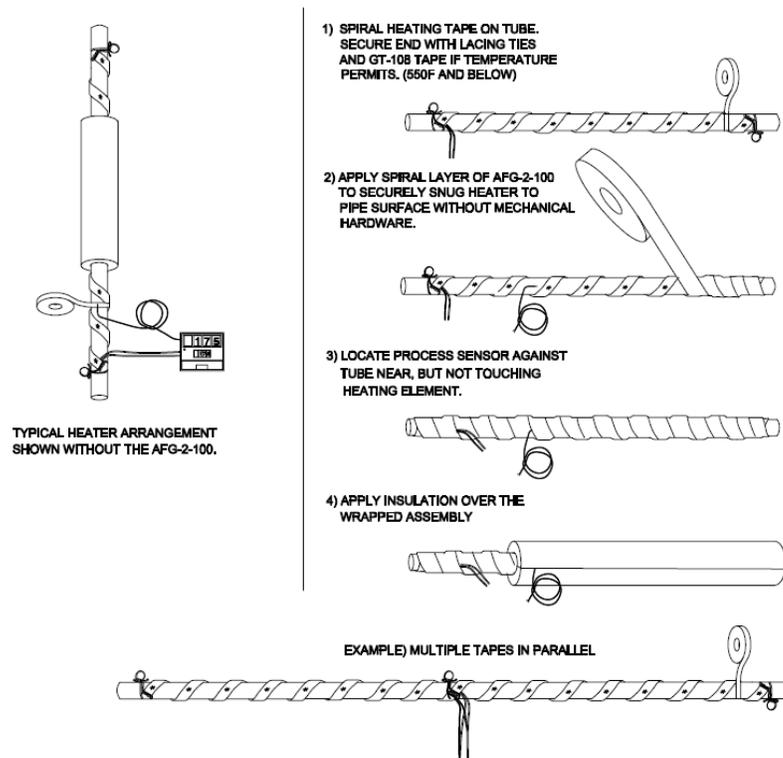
Heating tape assembly. Instructions from AmpTek
